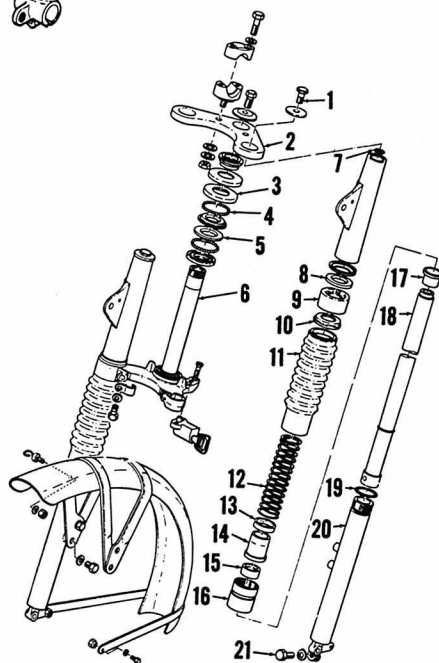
Exploded view of front suspension used on CS3 models.
